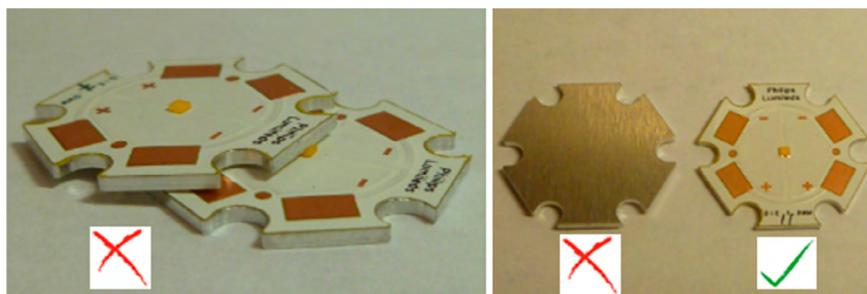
Do not stack assembled LED on PCBs on top of each other (left). Do not place assembled PCBs with the top side down on any surface (right).
